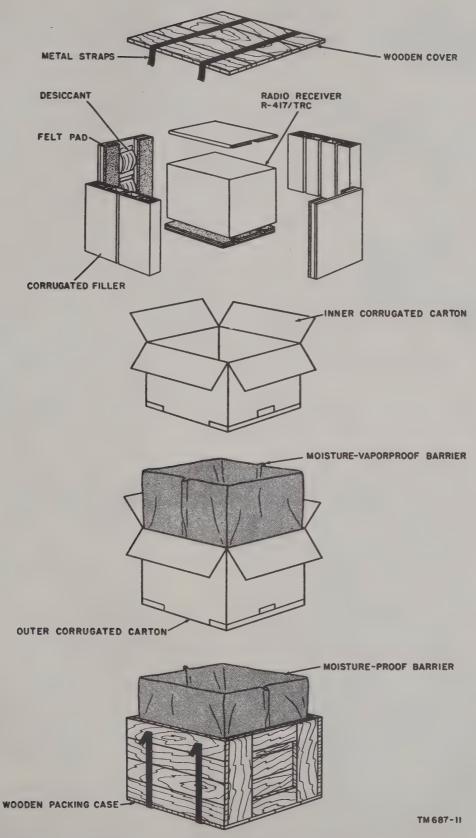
Typical packaging drawing for equipment that contains vacuum tubes.
